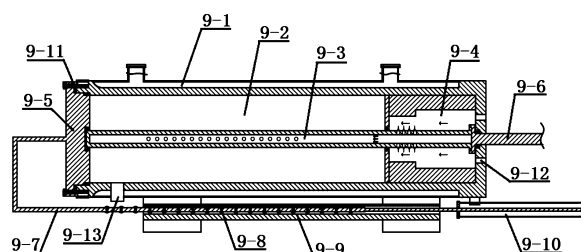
Profile of the dyeing vessel for SC-CO₂ apparatus: (9-1) dyeing vessel body, (9-2) dyeing cavity, (9-3) rotating warp beam, (9-4) fluid intake cavity, (9-5) dyeing vessel cover, (9-6) rotational drive shaft, (9-7) driveshaft, (9-8) pulley, (9-9) slide way, (9-10) hydraulic actuate cylinder, (9-11) hydraulic lock devices, (9-12) fluid inlet, and (9-13) fluid outlet.
